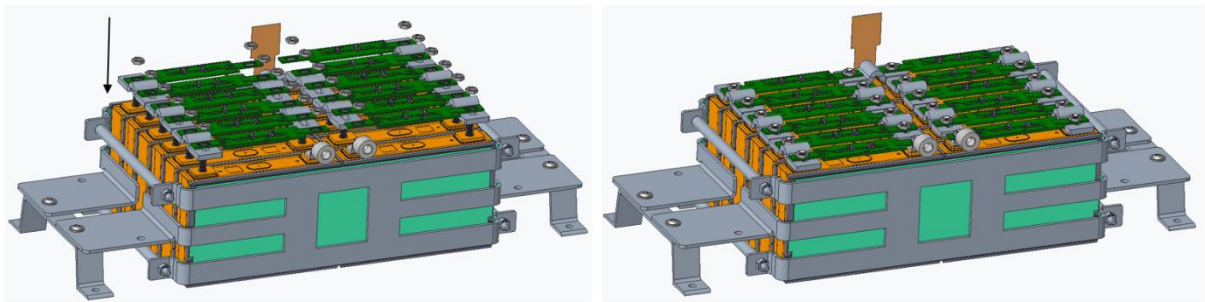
Assembly of CMBs on Cell-Stack, exploded view (left) and assembled view (right)
